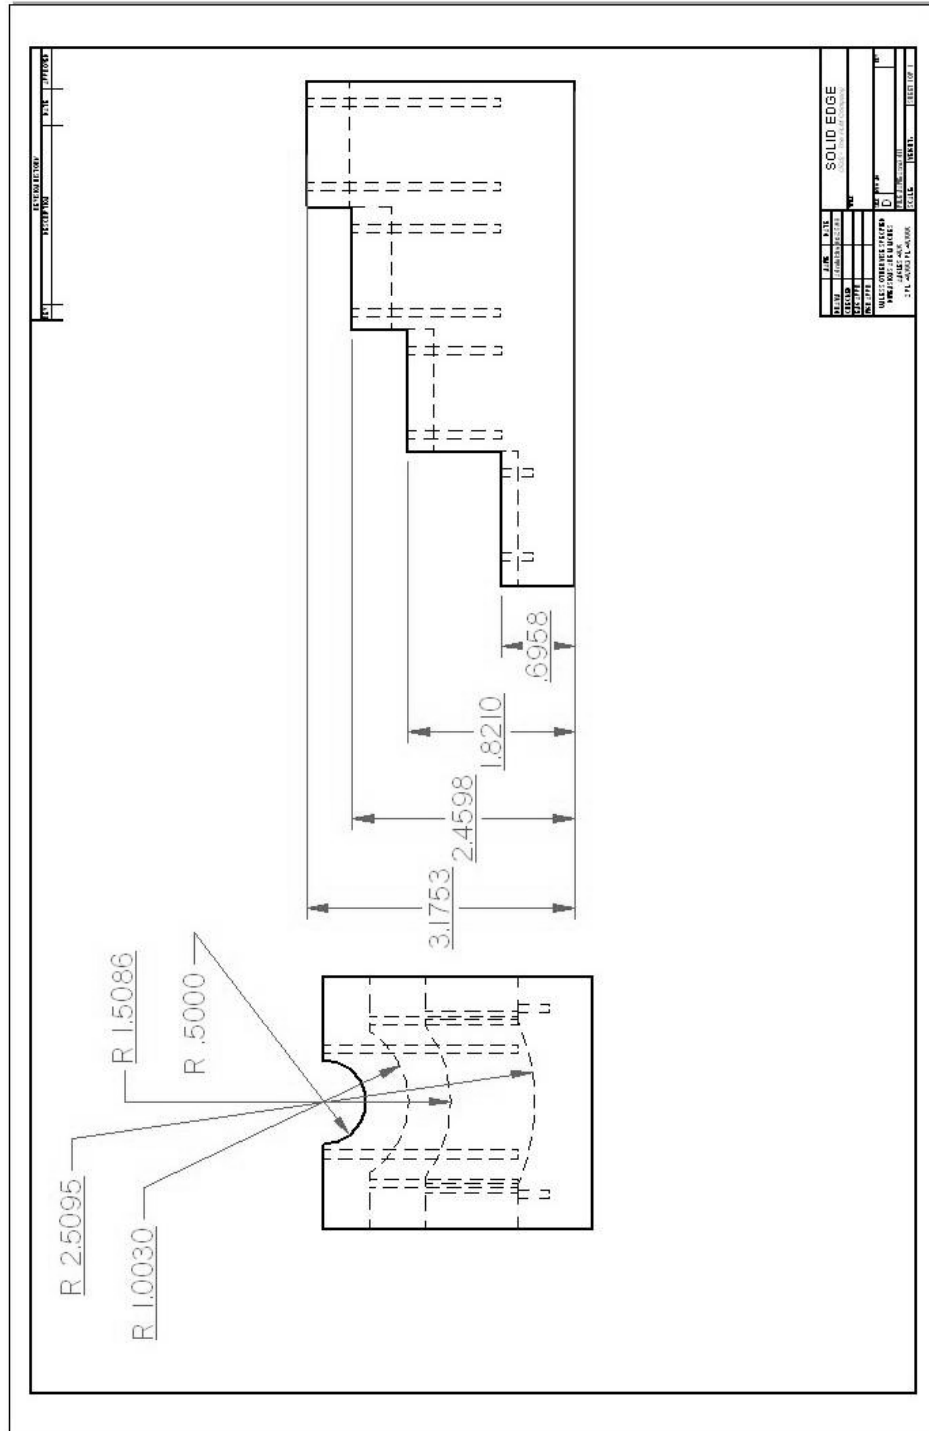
Physical dimensions of fixture used to produce externally applied compressive stress.
